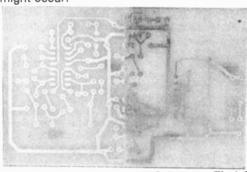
Here you can see how dirty a PCB can get. The left-hand half of this board has been cleaned with household scouring powder, the other half hasn't. Dry joints are easy to make on a dirty PCB
